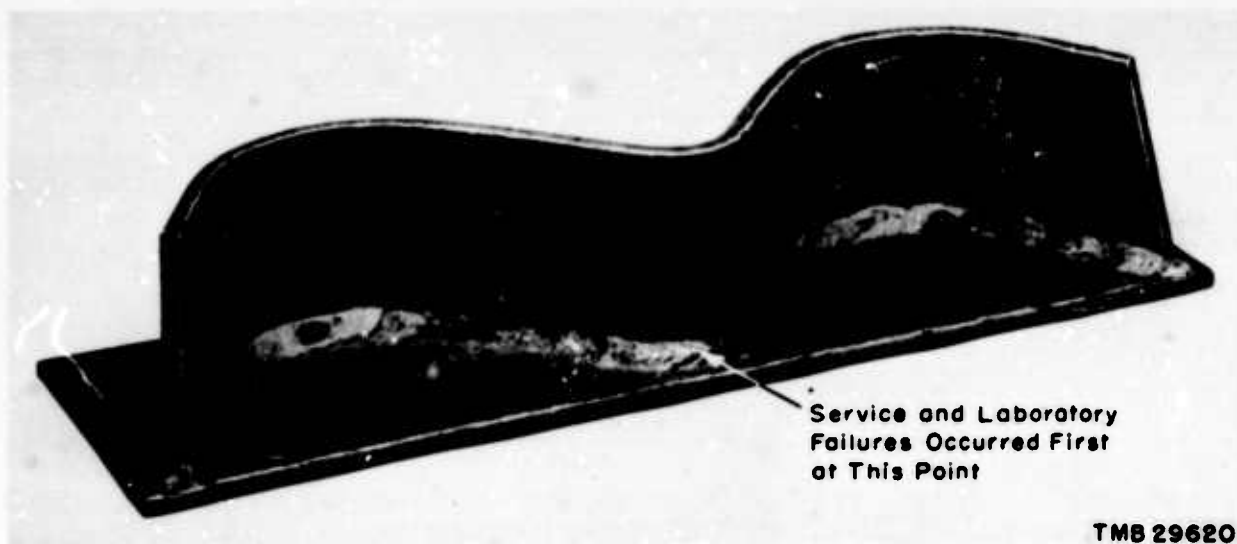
Location of Failure in Welded Steel Specimen, Design A
